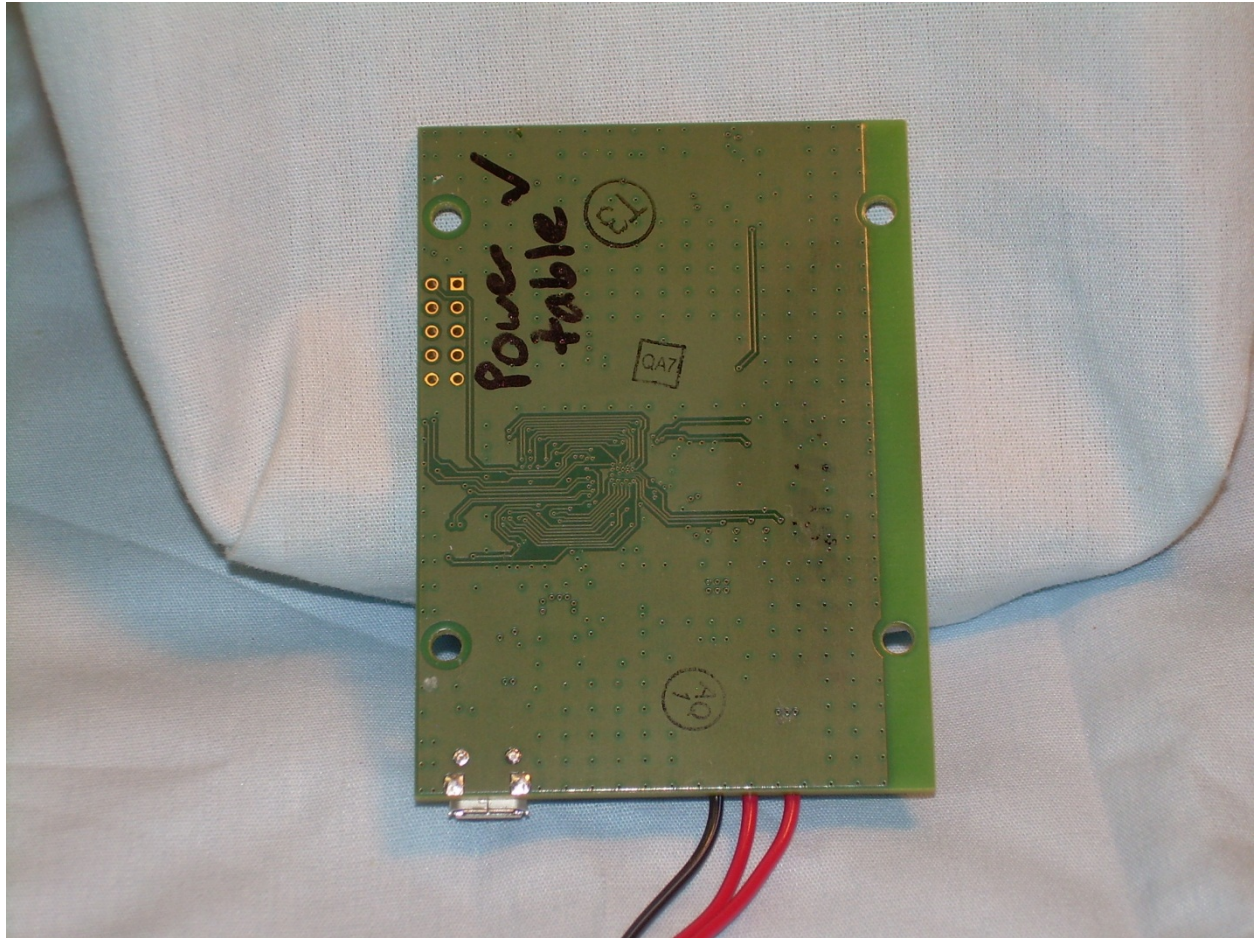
View of the EUT with Back and Bottom Cover Removed
